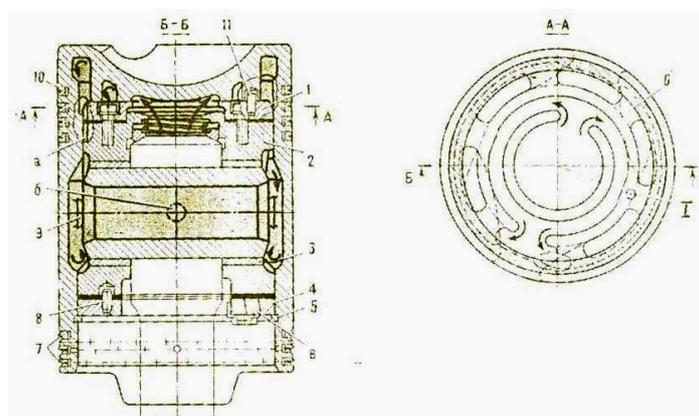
The piston of the two-stroke diesel engine 2D100: a, b, c - a groove and openings for oil exit from a head and a piston insert; 1 - top plate; 2 - insert; 3 - bushing; 4 - bottom plate; 5; 6 - radial rib; 7 - oil removal ring; 8, 11 - pin; 9 - finger stops; 10 - compression ring
